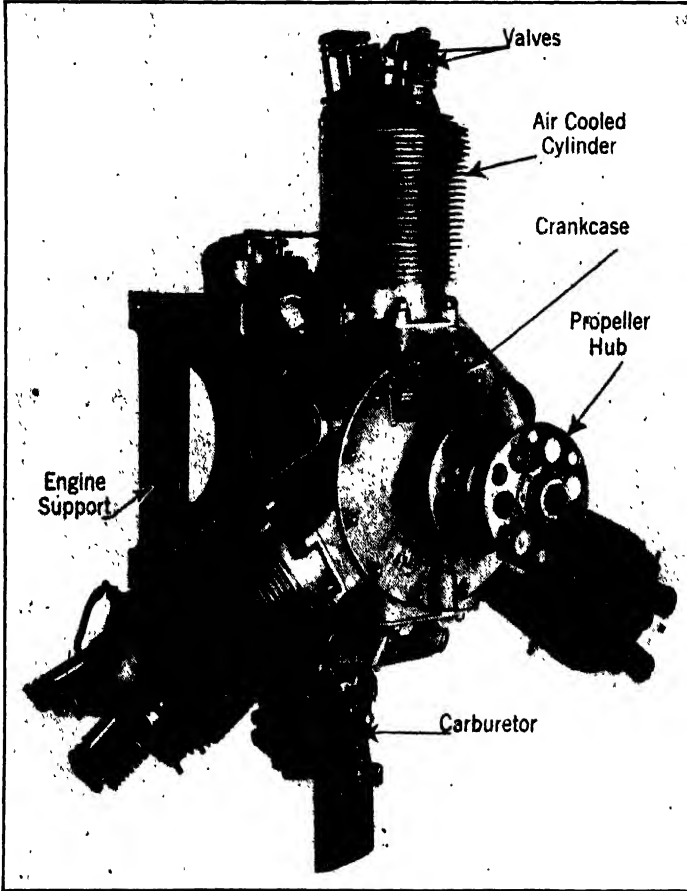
D.—Three-Quarter Front View of Wright "Gale" L 4 60 Horsepower, Three Cylinder Engine.
